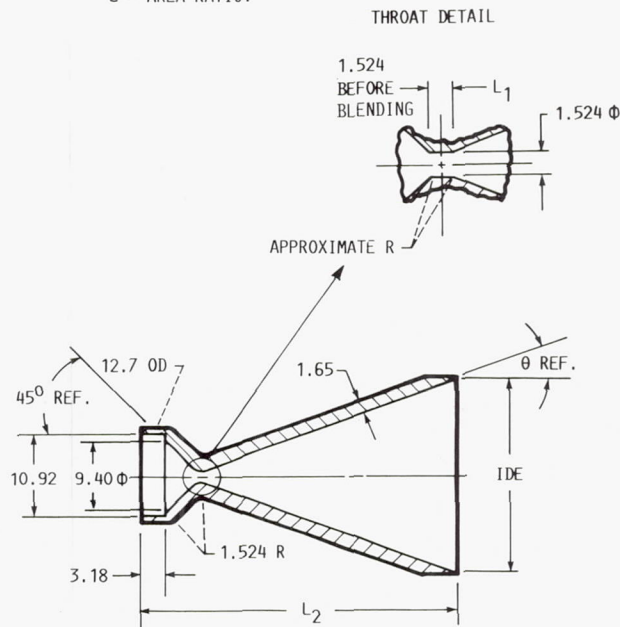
CONICAL NOZZLE DESIGN. (ALL DIMENSIONS ARE IN MILLI-METERS.)
